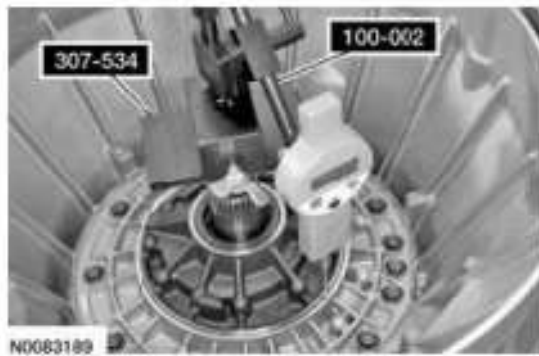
Identifying Transmission End Play Gauge 307-534 On Input Shaft
